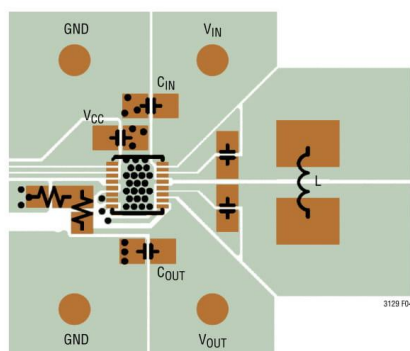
Typical 2-Layer PC Board Layout (MSE Package)
